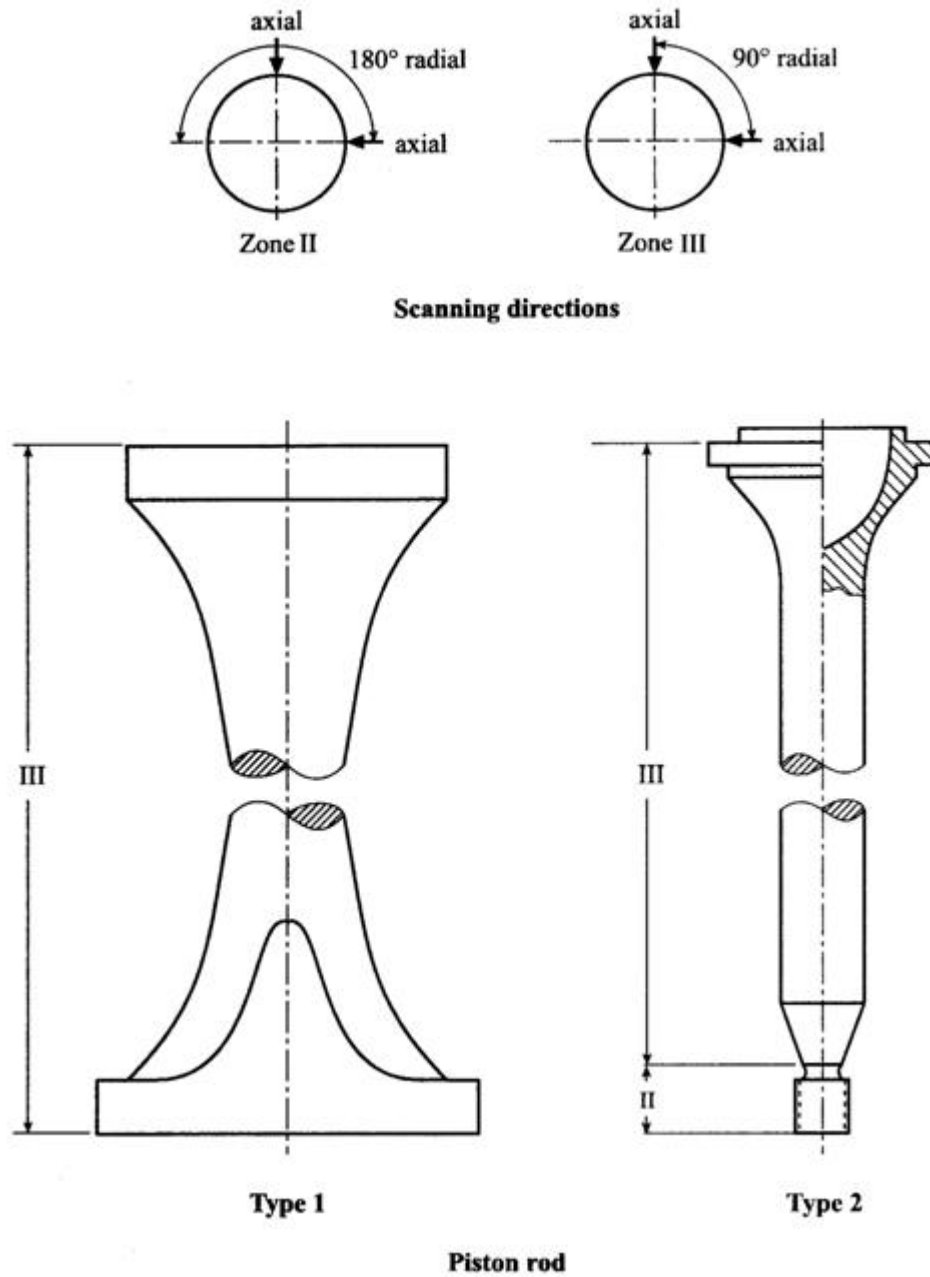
Inspection zones for ultrasonic testing of machinery components
